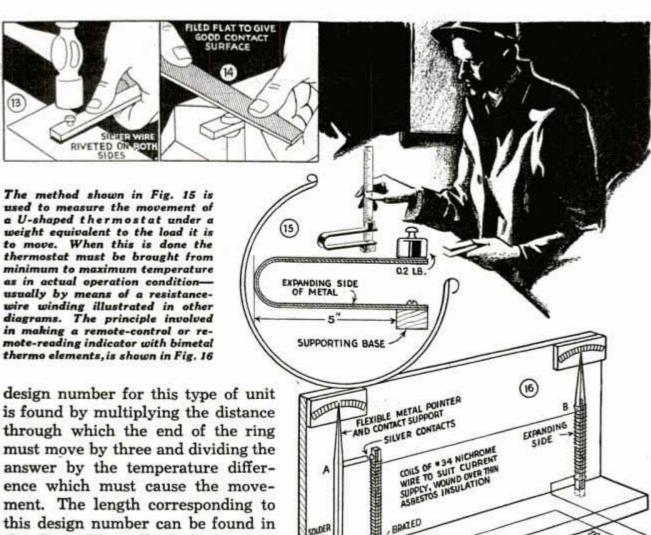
to 14 picture the steps of fitting a silver pin in a strip of thermostatic metal to provide good mechanical and electrical contact
